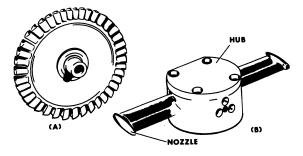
Turbine wheels. (A) Bucket type, (B) pinwheel type.
